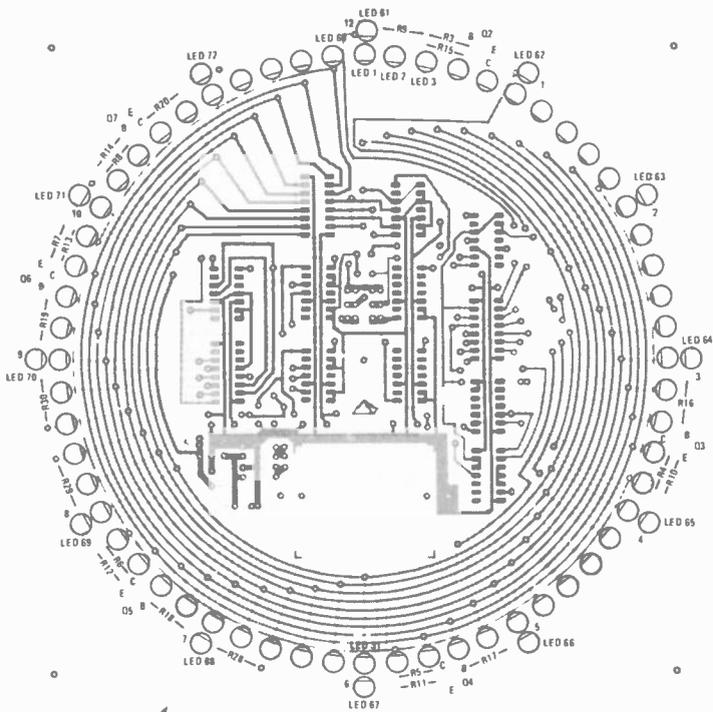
COMPONENT PLACEMENT for front of PC board.
